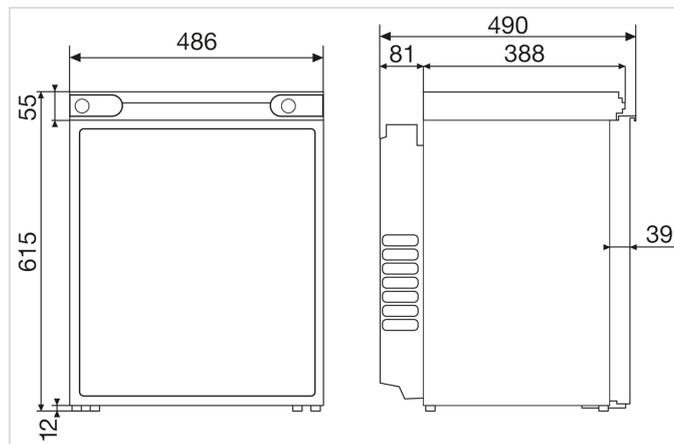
Technical drawing illustrating precise dimensions of the Dometic CombiCool RF60.
